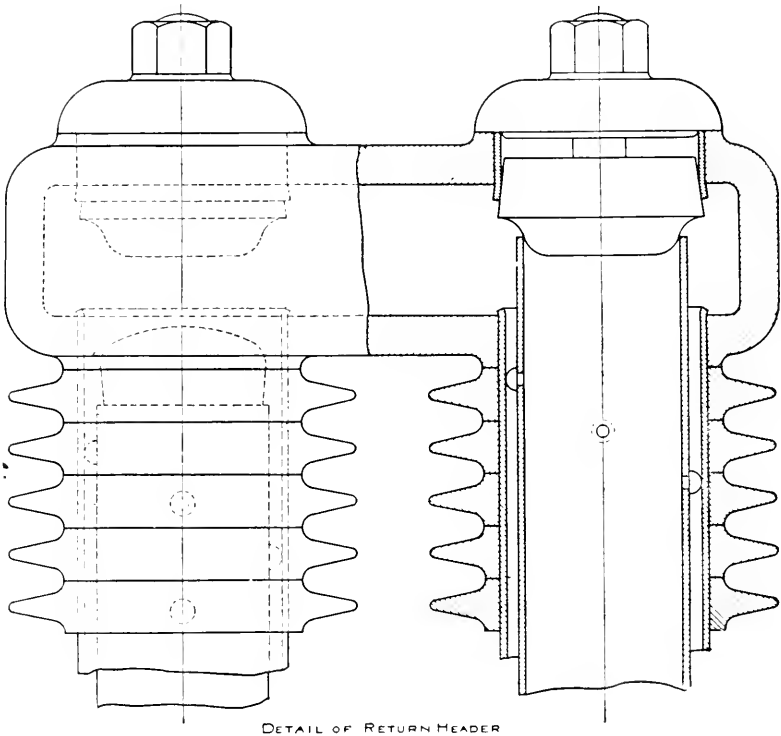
DETAIL OF FOSTER SUPERHEATER SHOWING CONSTRUCTION OF ELEMENTS AND HEATERS.
